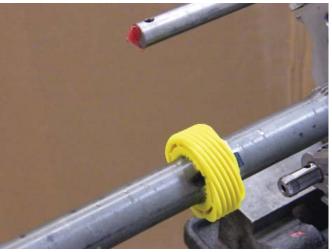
This is what the speedo drive gear should look like except that this is a 7 tooth drive gear.
